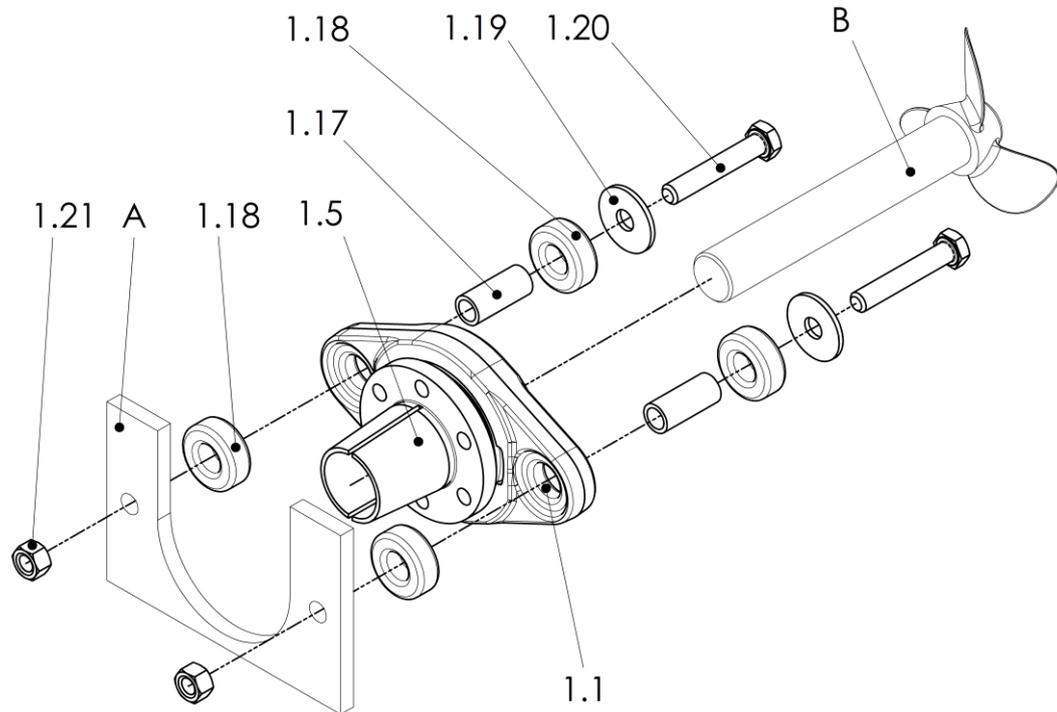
Mounting the bearing to the bulkhead (CENTA-TB-2)
